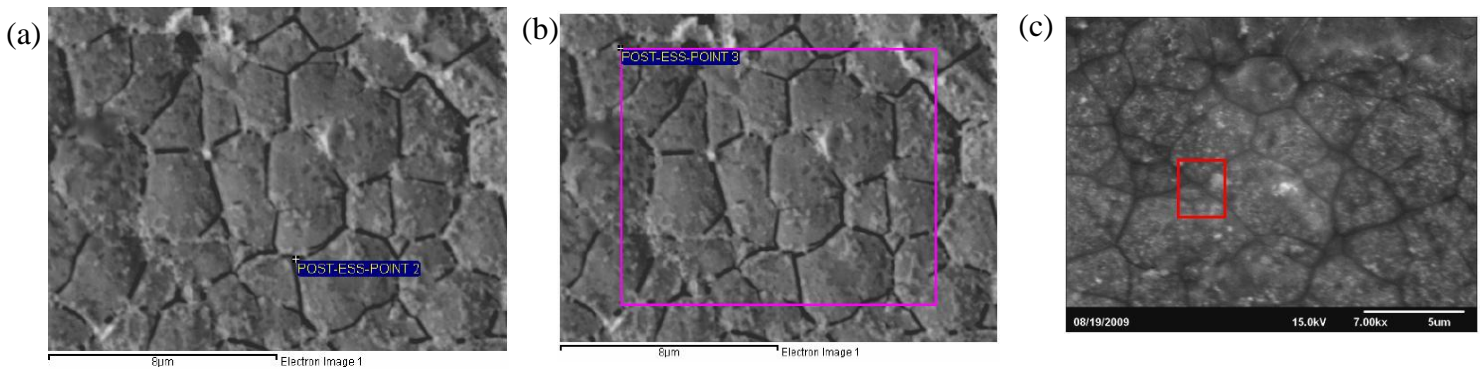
Top view inspection (a) Spot EDX analysis at PCB side, 8000X magnification. (b) Area EDX analysis at PCB side, 8000X magnification. (c) Area EDX analysis at PBGA package side substrate, 7000X magnification.
